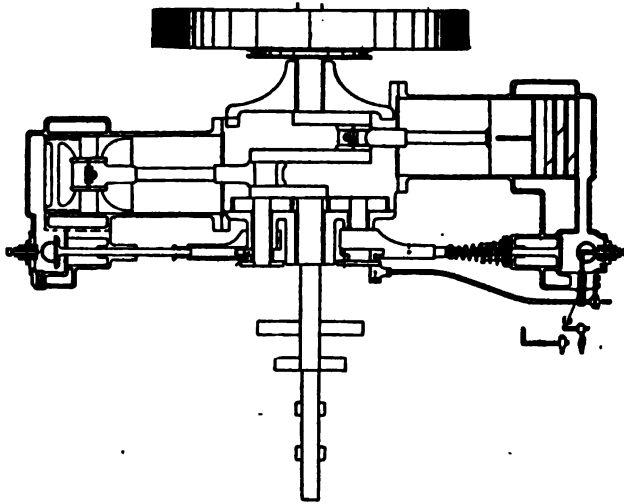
Sectional Diagram of the Haynes-Apperson, Double Opposed Cylinder Motor, showing valve arrangements and details of primary ignition device.
